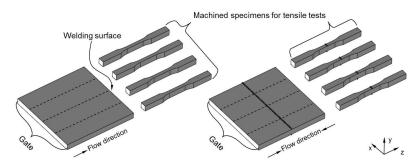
Schematic drawing of test bars from injection molded and welded plaques: (a) injection-molded sheet and (b) the welds.
